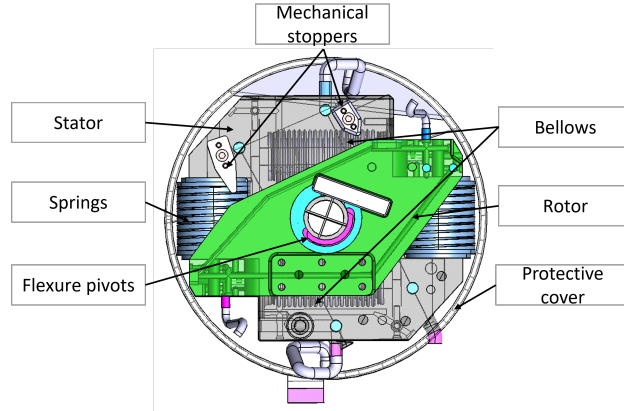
Upper/Lower steering mechanism detailed axial view after hiding the protective cover on the mirror side.
